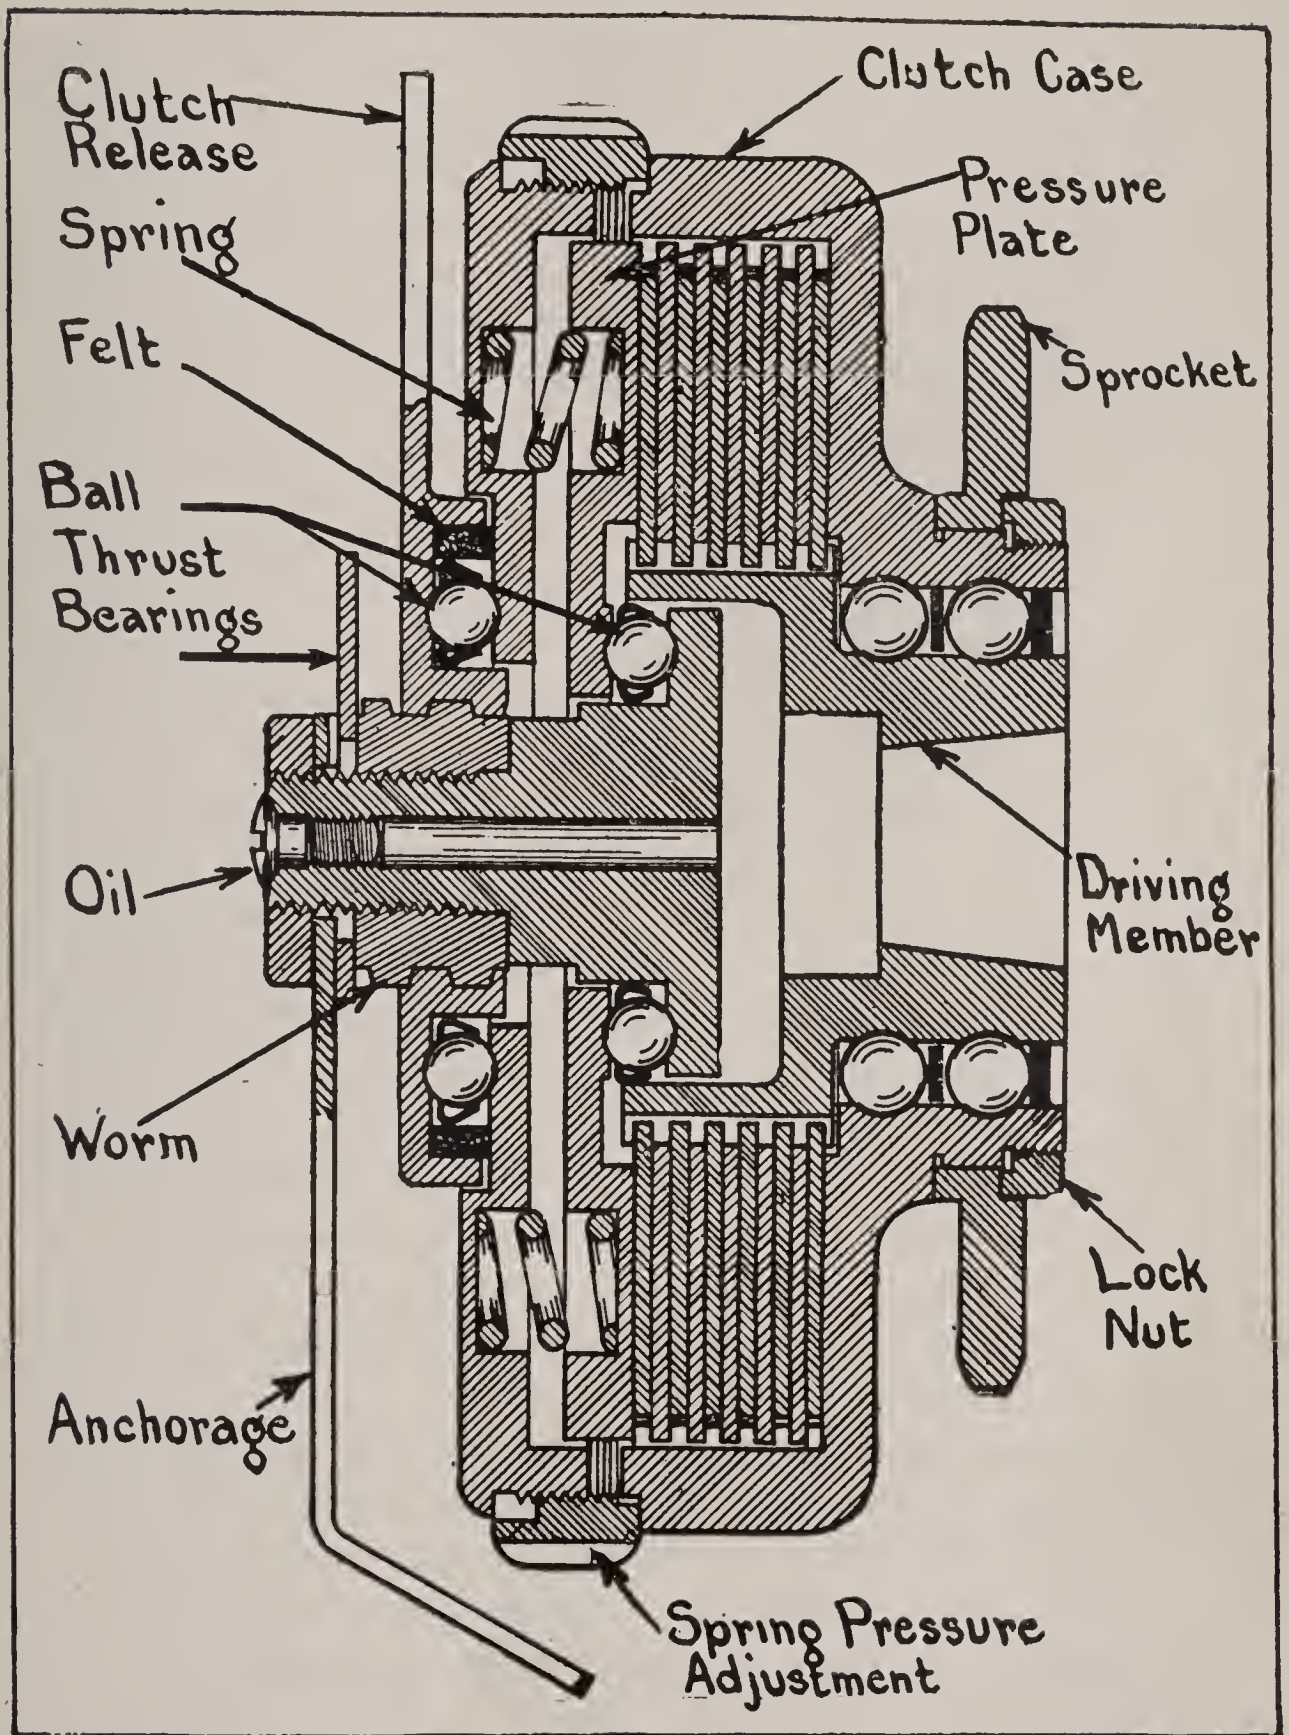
Sectional View of the Eclipse Engine Shaft Multiple Disc Clutch.
